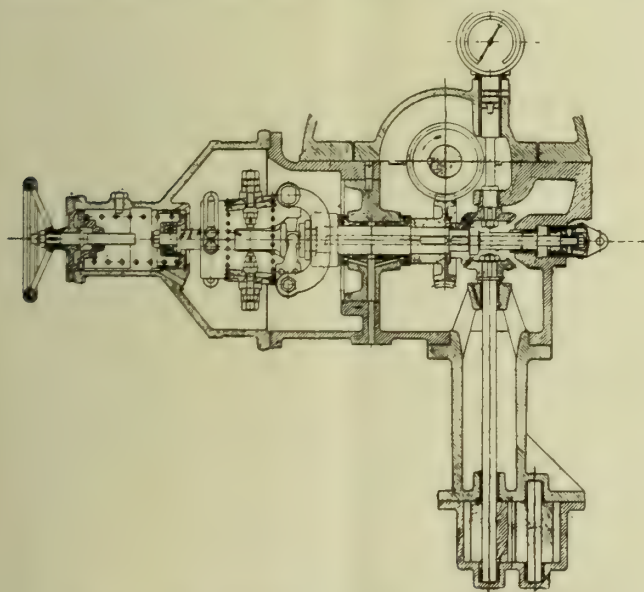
THE GOVERNOR, OIL PUMP AND TACHOMETER OF A FRASER AND CHALMERS TURBINE.
